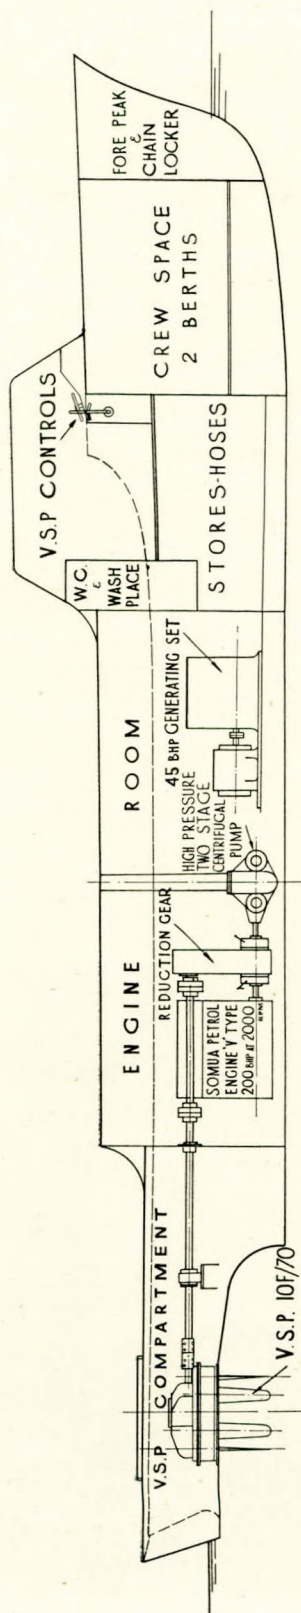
Fire-floats (reduction gear has been introduced giving a speed of 1,000 r.p.m. on the shaft, and the gearing integral with the propeller gives the latter a speed of 265 r.p.m.).
